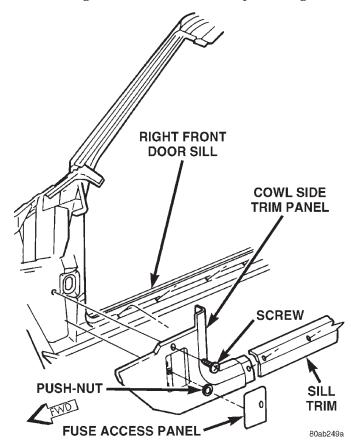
Right Cowl Side Inner Trim Remove/Install
